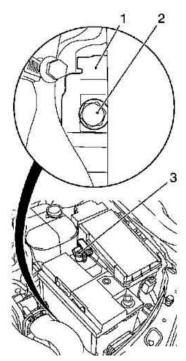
Removing the battery: 1 - Bracket 2 - attachment bolt, 3 - positive terminal
